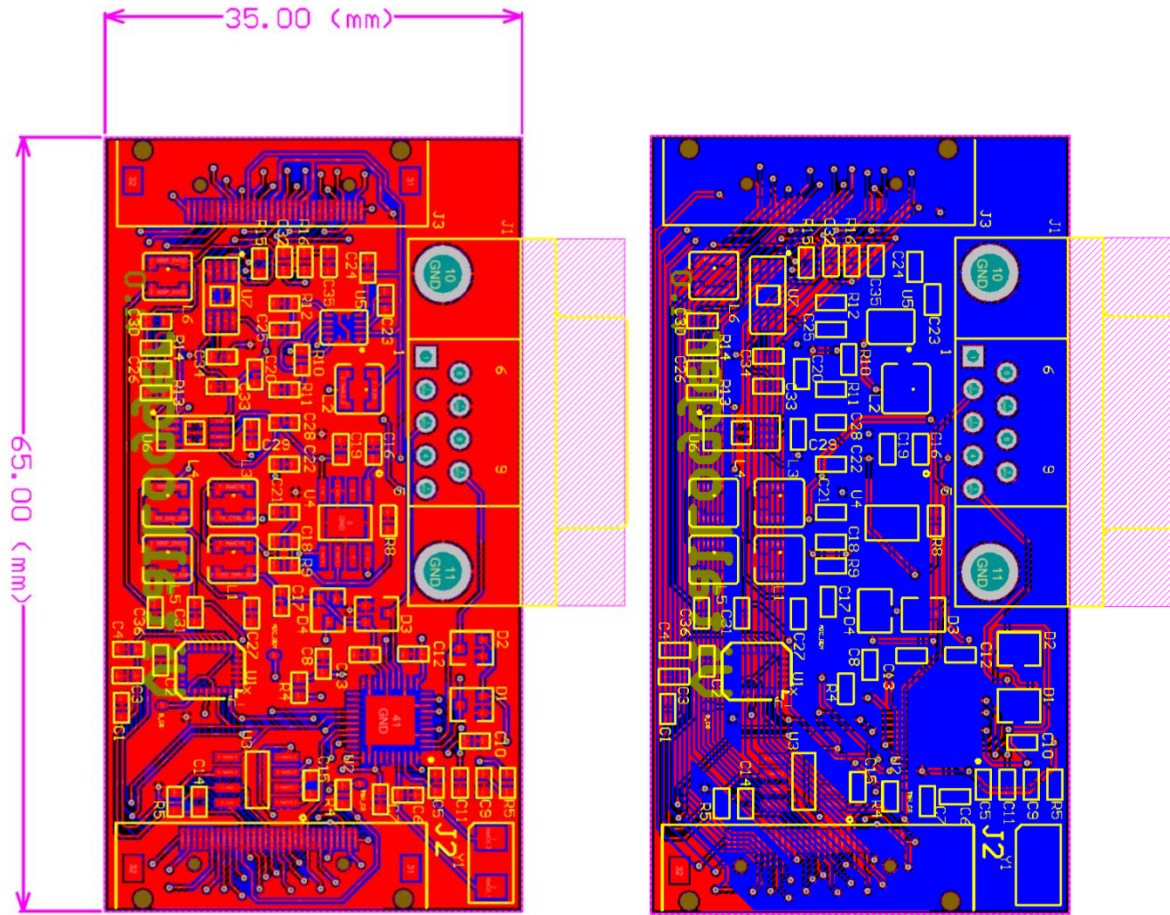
PCB design of VitalLogger extension board first prototype. The left image shows the top layer and the right image the bottom layer.
